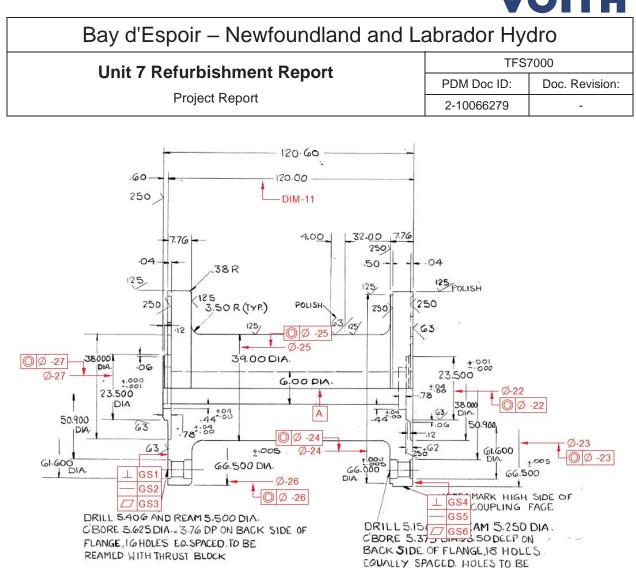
Generator Shaft Dimensional Inspection Plan
